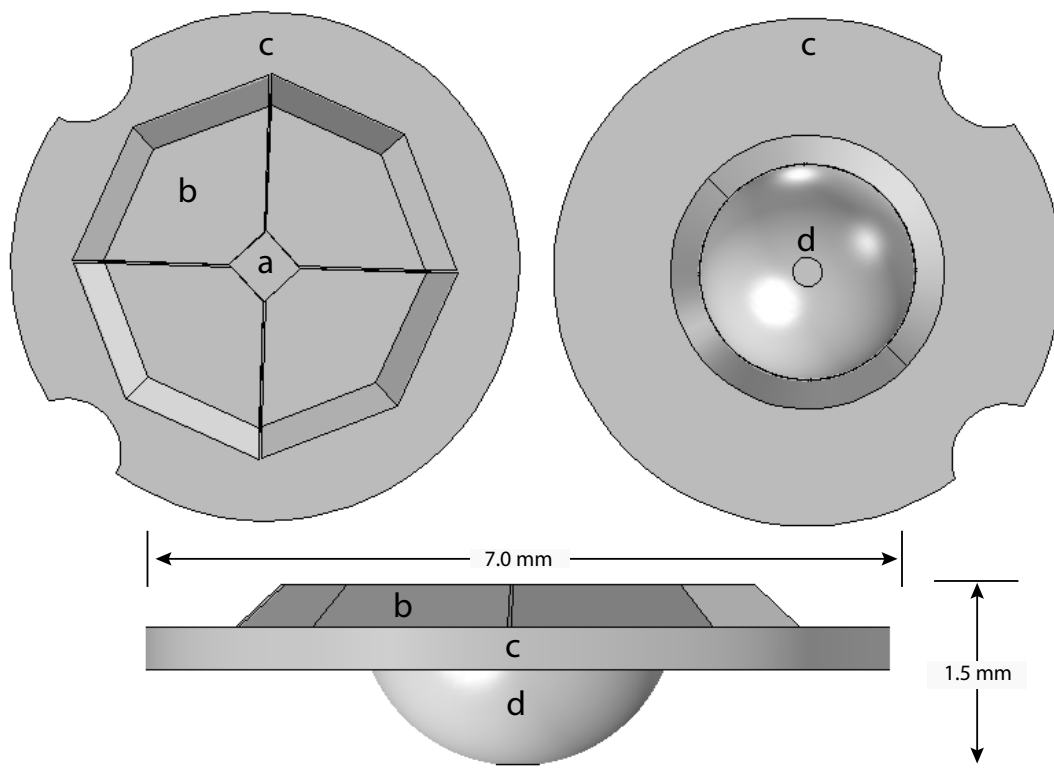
Schematic of diamond optical assembly, the left side depicts the front and the right side the back of the assembly, at the bottom a side view of the assembly is visible. The assembly consists of seven parts; the NV containing diamond (labeled a), four prisms identical prisms (b), a ring (c) and a lens (d)
